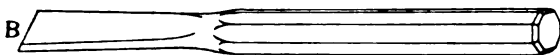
“FULLERING” TOOL FOR CAULKING BOILERS.
